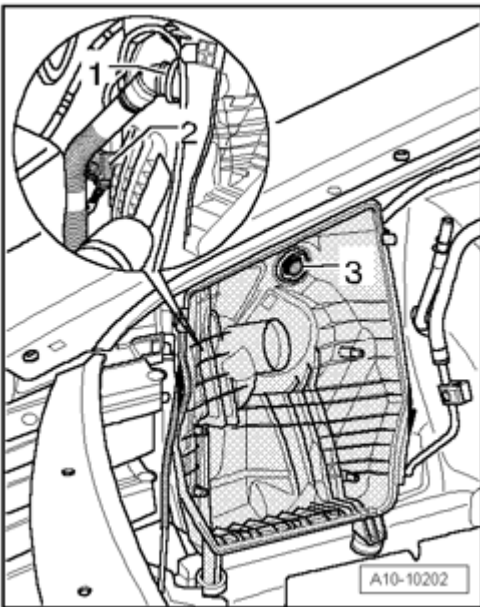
Identifying Hose, Electrical Connector & Spreader Clip
